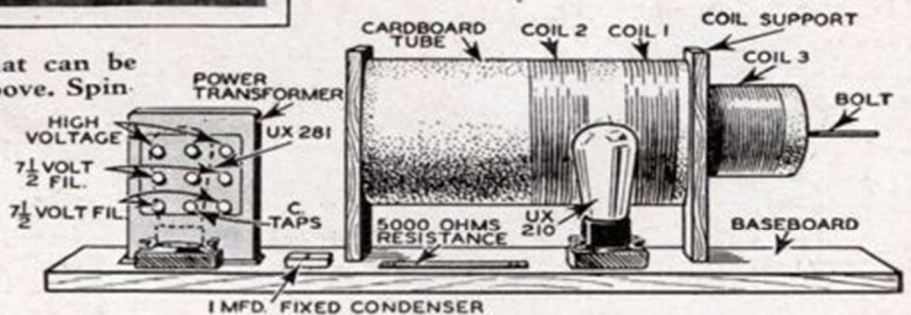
Here is a side view of the vacuum tube Tesla coil, showing the layout of parts on a baseboard. For higher power, an additional tube may be used, wired up in parallel with the 210 tube.
